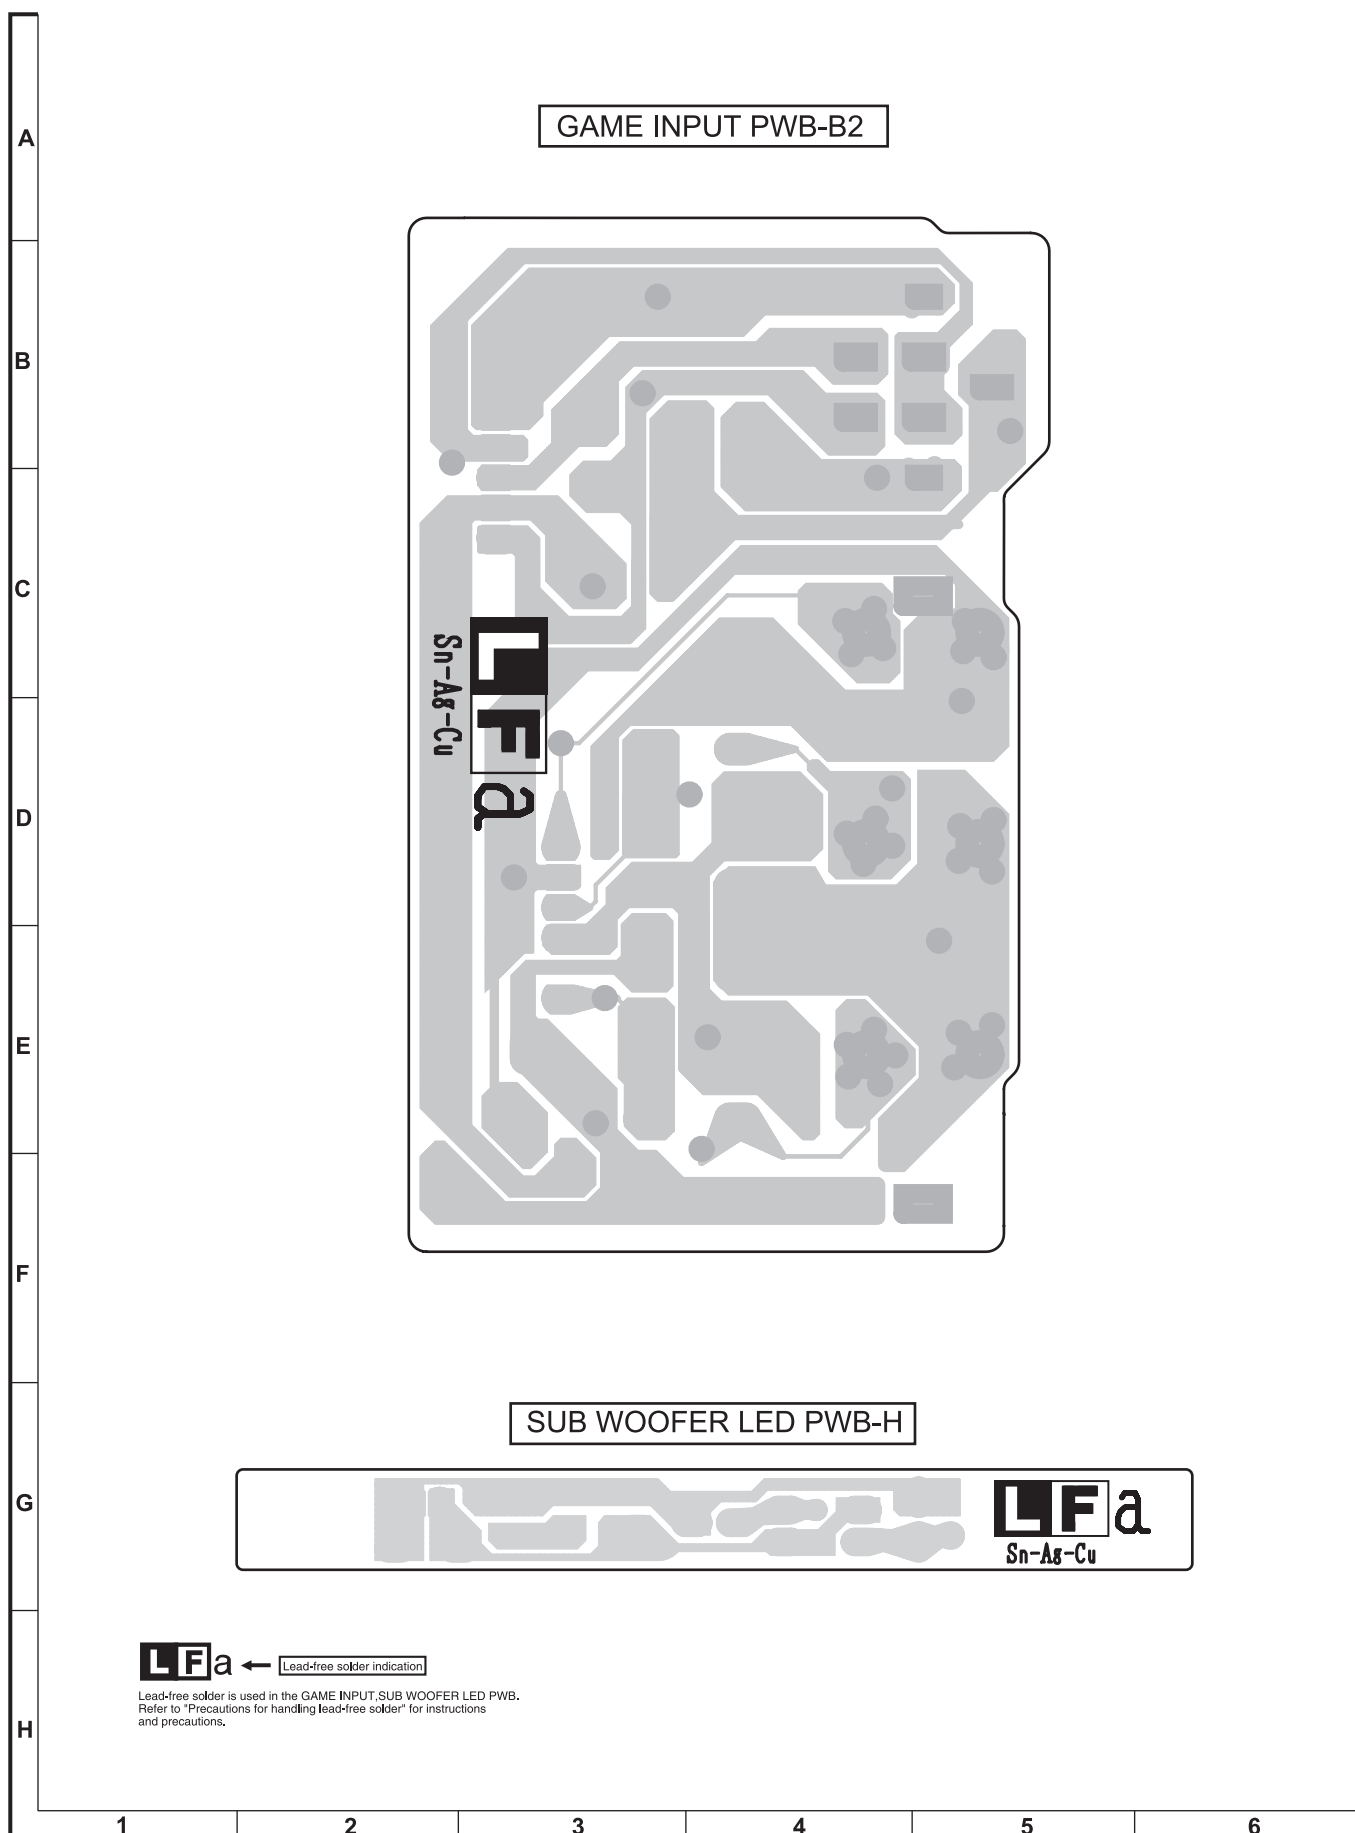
WIRING SIDE OF PWB (BOTTOM VIEW) (11/15)
